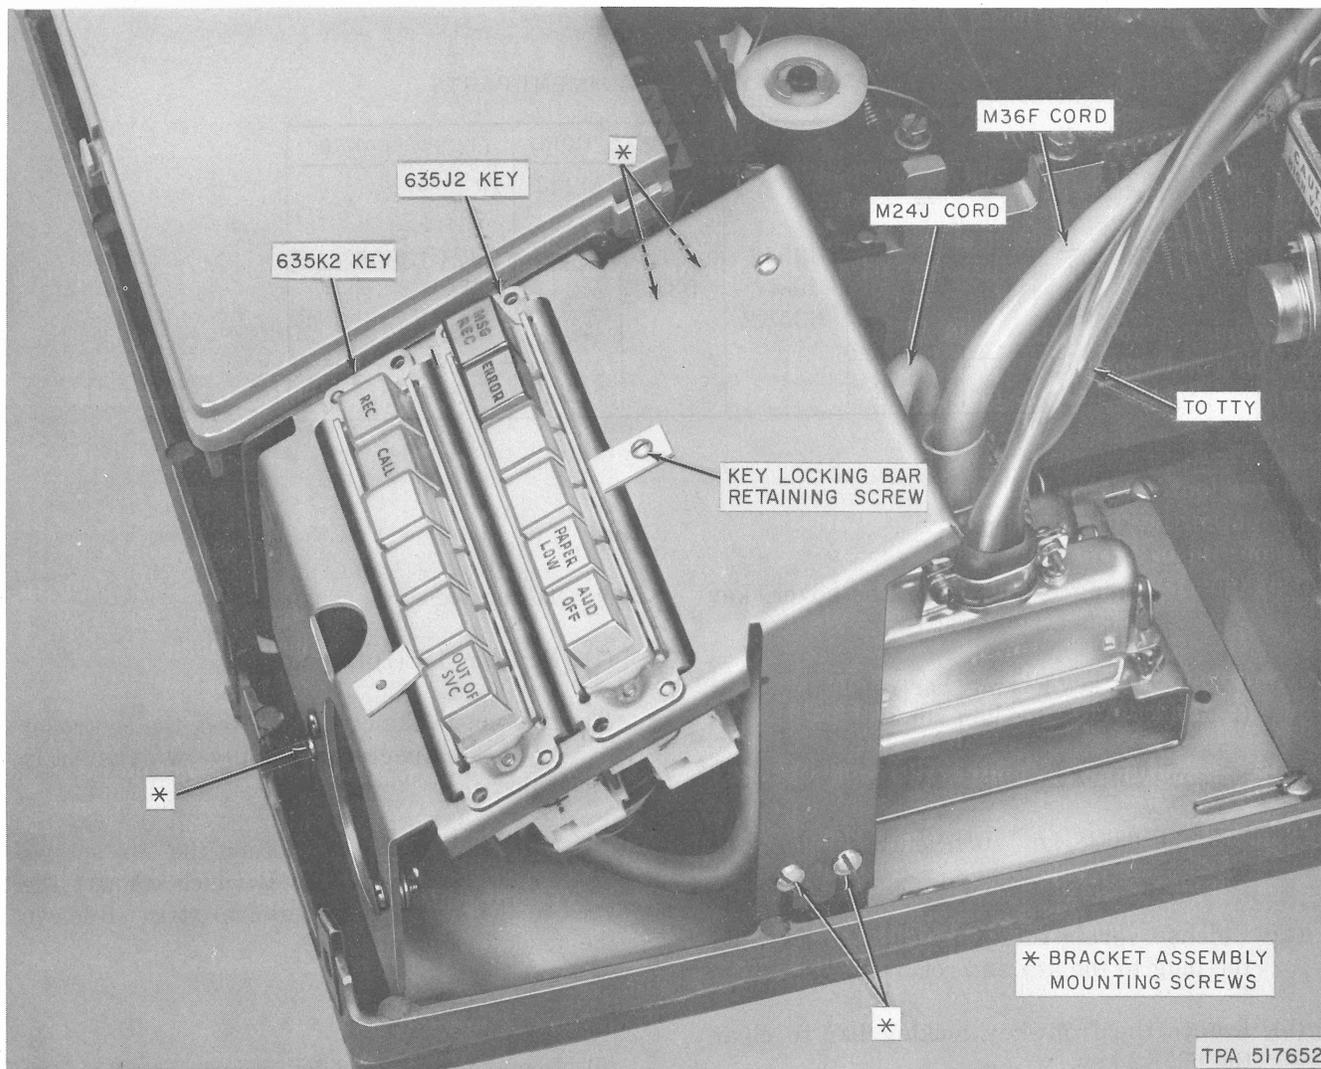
DAS 804N2 Mounted in 33 RO TTY
